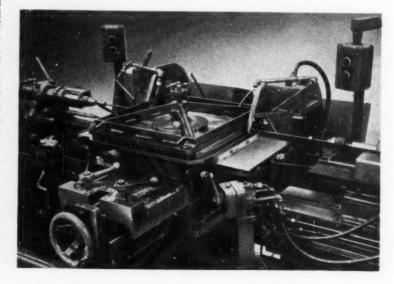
Twenty-five holes of small diameter are drilled from all four sides in this injector plate. The opposed holes must be aligned within a tolerance of 0.005 in. at a depth of 9 in.
